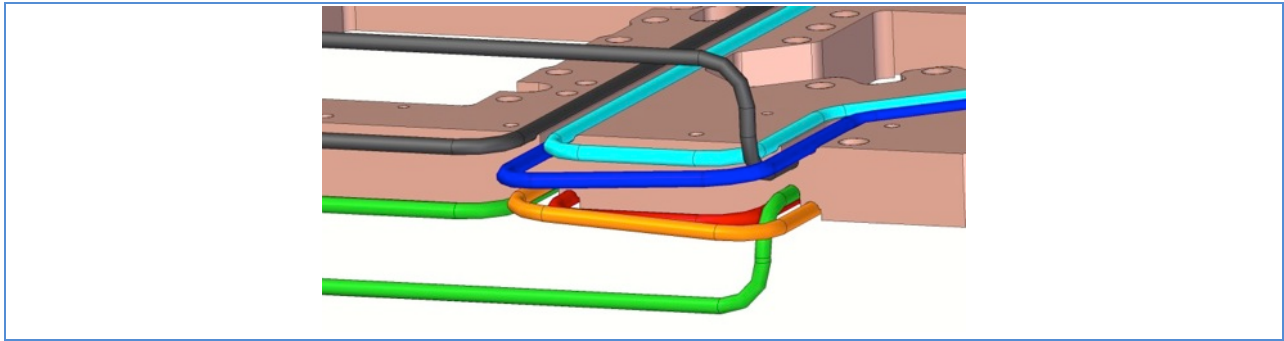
Cutaway of the channels in the cryoplate top and bottom
